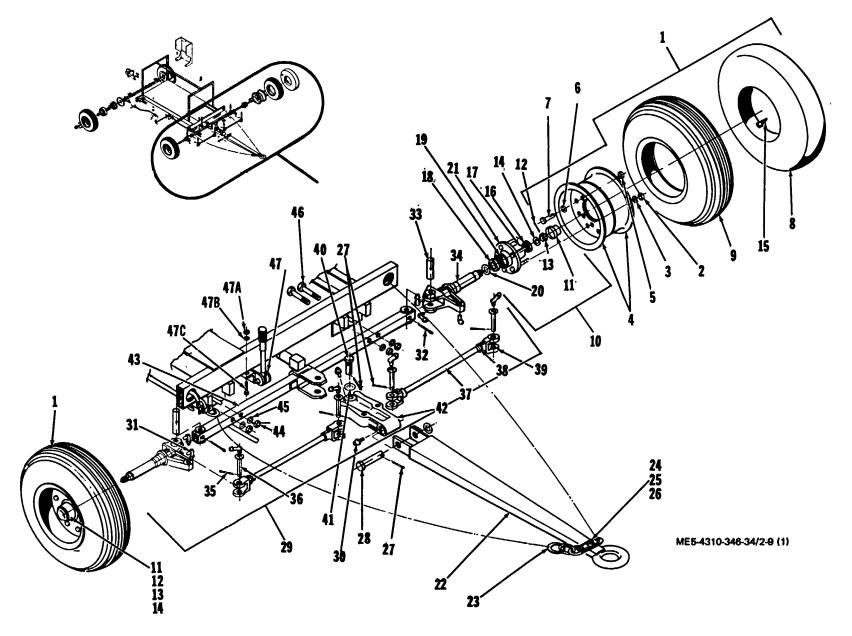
Chassis and Wheel Assy. (Sheet 1 of 2)
